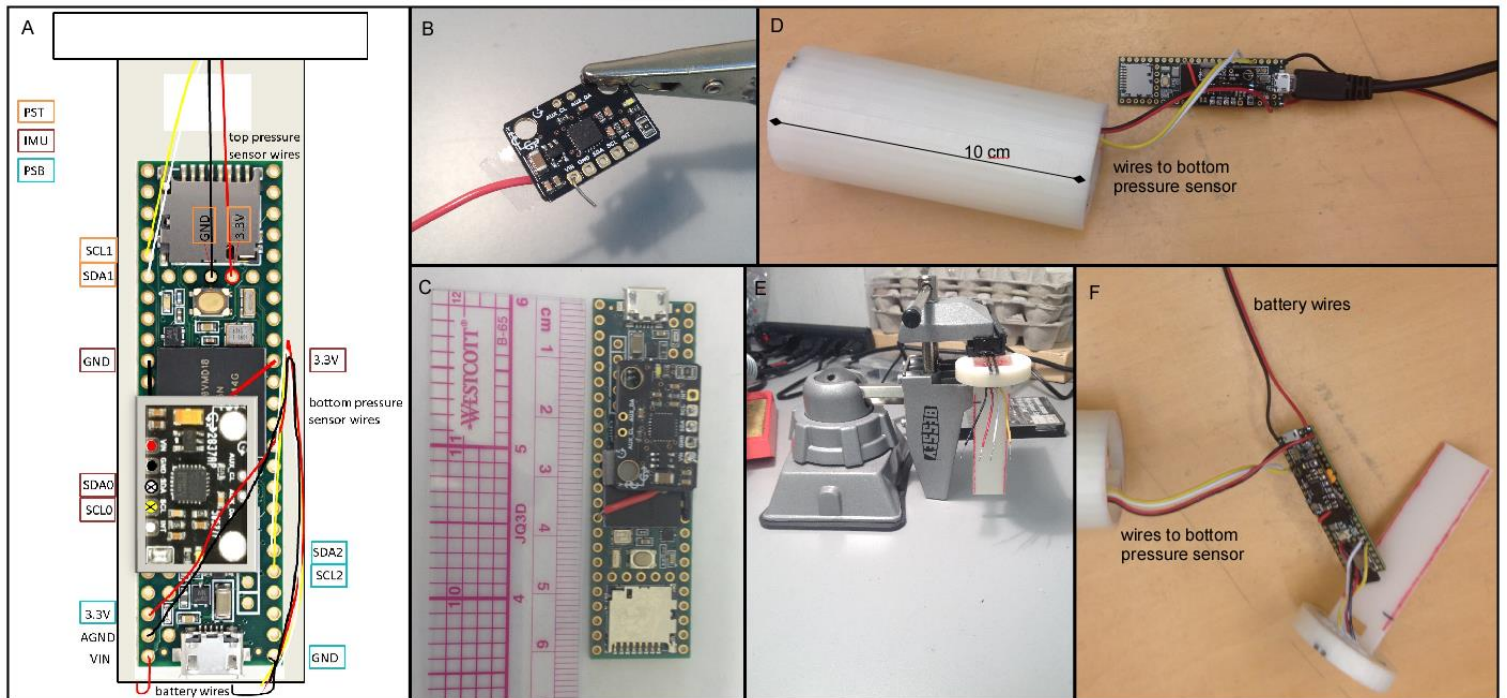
Electronics through various stages of assembly. A) Pinout showing approximate layout of wires. B) MPU6050 with hooked wire, not yet soldered. C) MPU6050 mounted on and soldered to Teensy. D) Bottom pressure sensor wires soldered to Teensy. E) Top pressure sensor with clipped wires. F) Teensy with soldered wires from all sensors.
